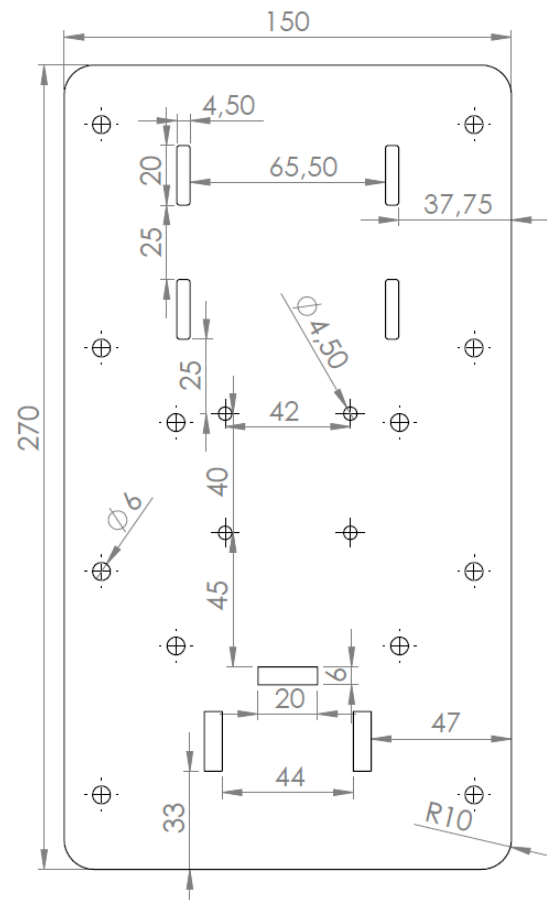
Drawing of the top acrylic baseplate. Dimensions are in millimetres. Thickness of the part is 6 mm.
